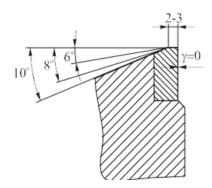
Geometric parameters of a conventional planer tool in the main cutting plane.
